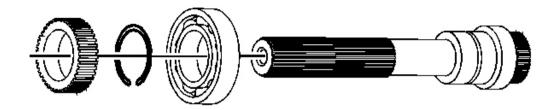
View Of Rear Output Shaft Components Courtesy of GENERAL MOTORS CORP.
